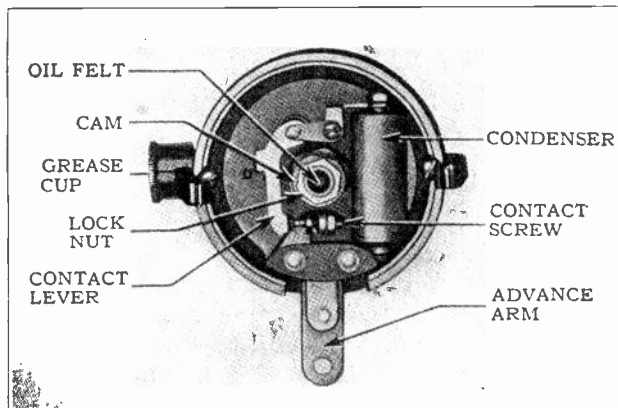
Top view of the breaker mechanism and condenser of an ignition distributor. Note the names of the various parts.
